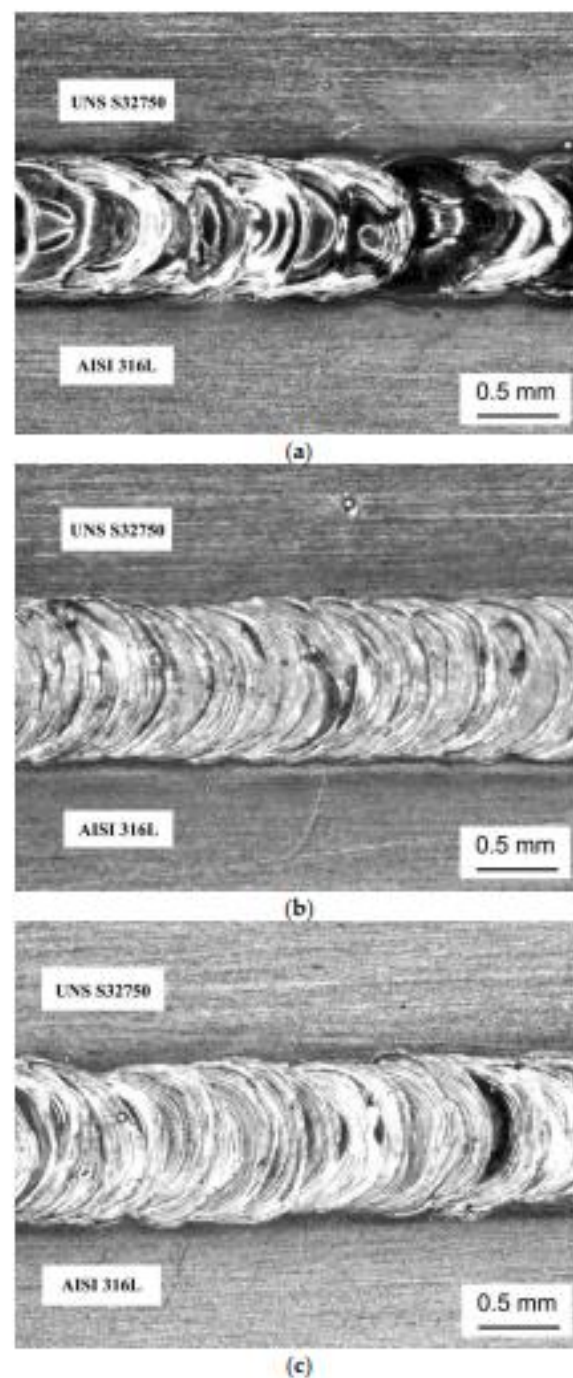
Top view of dissimilar welded specimens with: (a) 45 J/mm, (b) 90 J/mm and (c) 120 J/mm.
